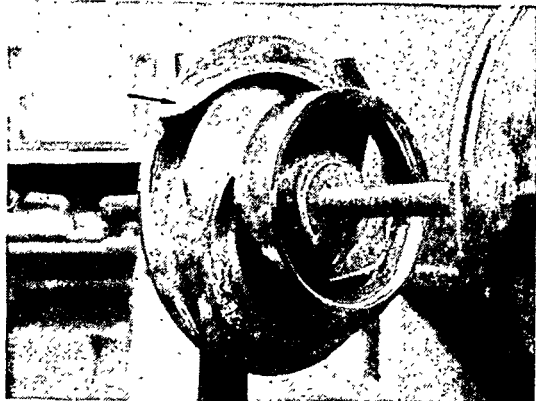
Centrifugal pump impeller showing shape of vane
